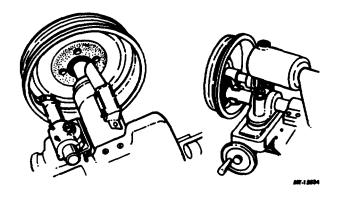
Reconditioning Drum on Brake Drum Lathe
